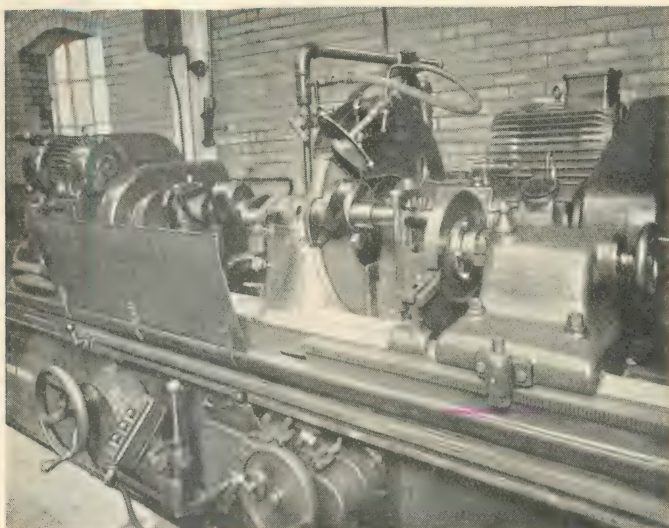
THE CHURCHILL CRANKSHAFT GRINDING MACHINE
